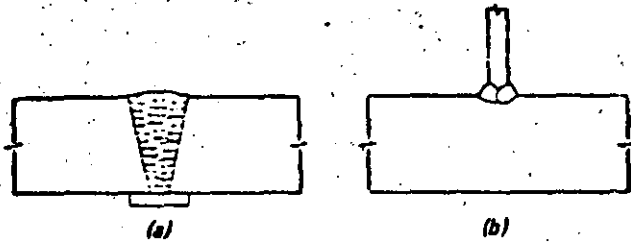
A groove-welded butt joint in thick plate (a) requires a higher preheat, because of joint restraint, than a fillet-welded joint of a thin member and a thick plate (b). See Section 2.3 for the minimum size weld required by AWS.
